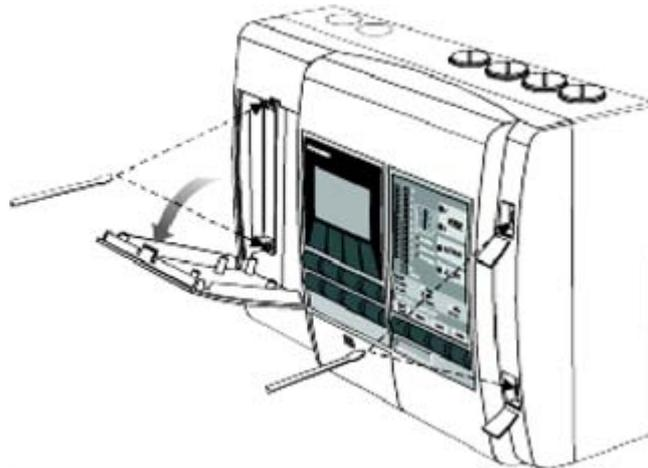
Removing the VLP or VLS front cover for chassis replacement
